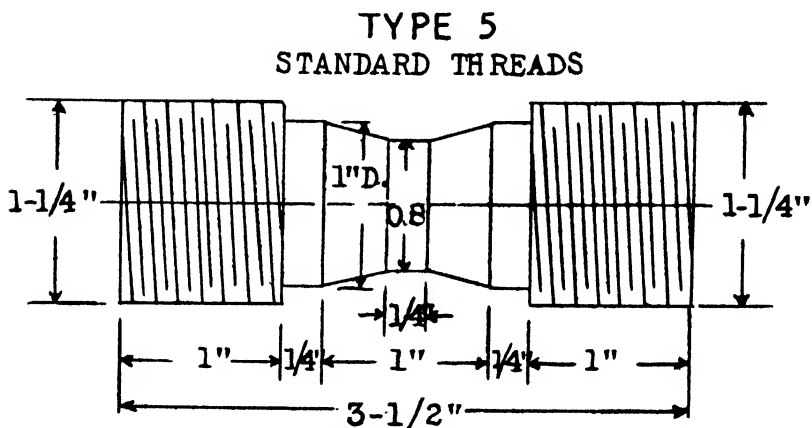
Specified Ratios of Dimensions for Test Specimens for Tensile Strength Tests of Malleable Iron Castings.
